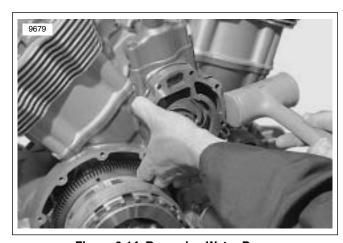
Removing Water Pump (clutch cover removed for clarity)
